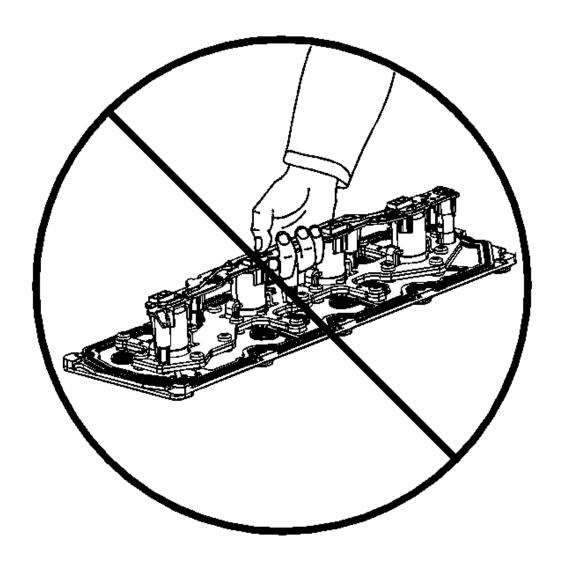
Valve Lifter Oil Manifold Courtesy of GENERAL MOTORS CORP.
